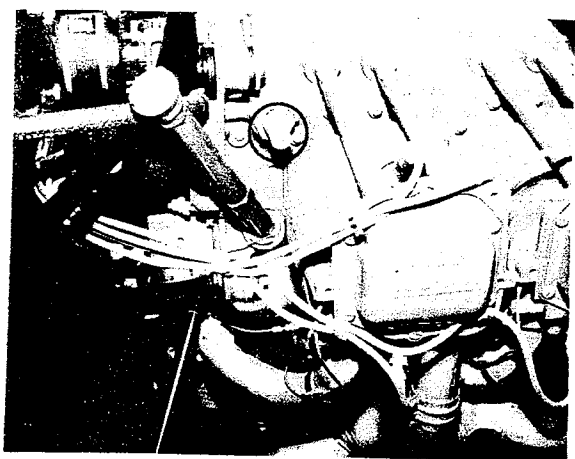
OIL PRESSURE RELIEF VALVE
